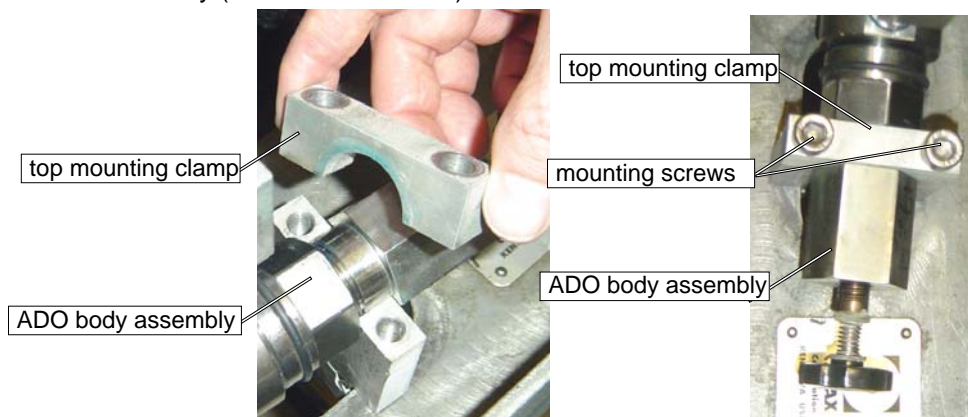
Install the Top Mounting Clamp to Secure the ADO
